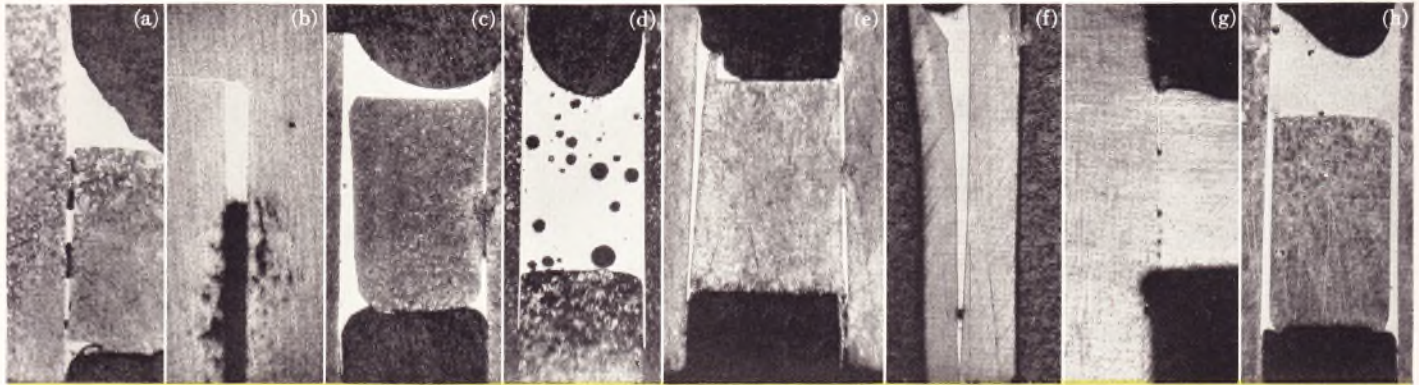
These sections of brazed joints show the results of poor clearances and dirty surfaces. Because the clearance was too great the fill in (a) is poor and there are voids because of dirty surfaces. In (b) the fine line of alloy at the top shows proper clearance and complete fill. The vertical clearance is too great and the metal could not be drawn by capillarity to fill the space. The plug in the tube shown in (c) was improperly placed and the resulting joint exhibits excess alloy. Voids appear as a result of dirt. A joint similar to (c) is shown in (d) where the heating cycle was inadequate. This is evidenced by the lack of penetration of the alloy in the joint although the clearances are correct. The voids in the brazing metal are due to flux inclu-
